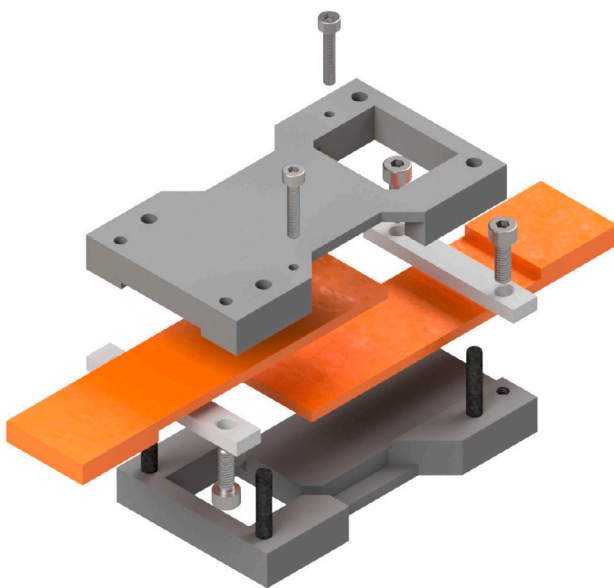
Exploded view of the fabricated fixture used to ensure alignment of adherents in manufacturing of the specimens.
